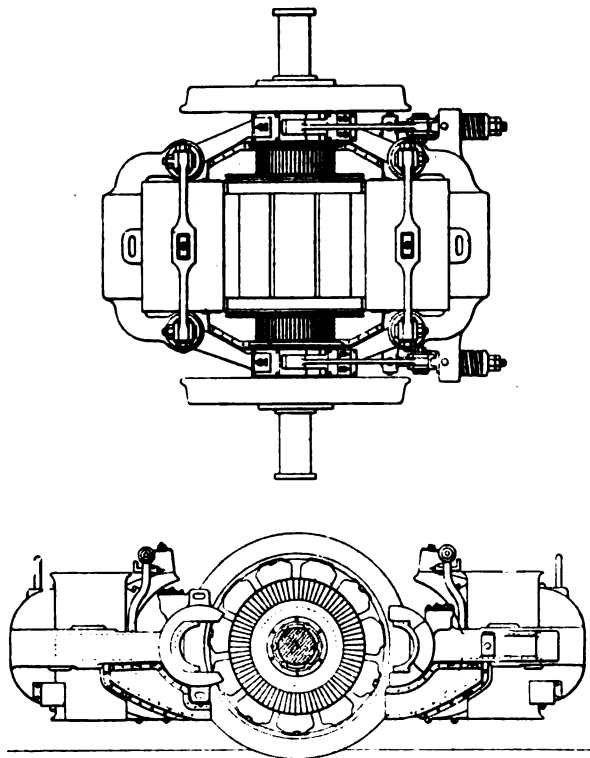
PLAN AND ELEVATION OF MOTOR.
